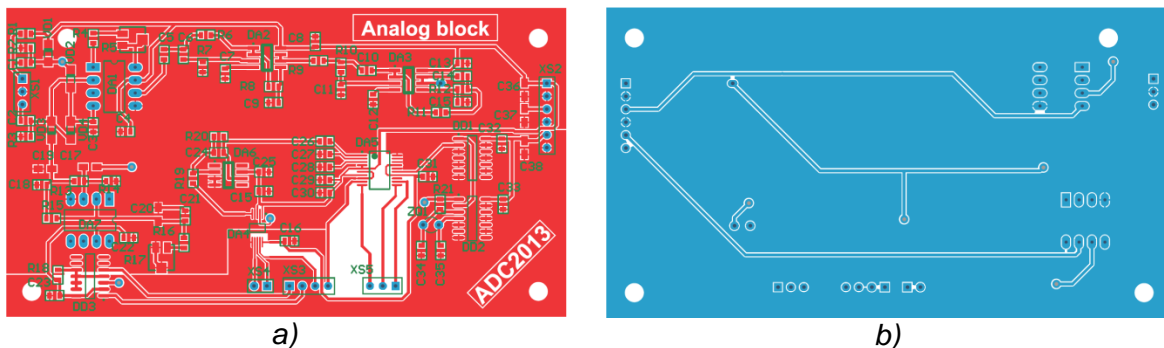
The PSB of ASP device: Top side (a); Bottom side (b).
